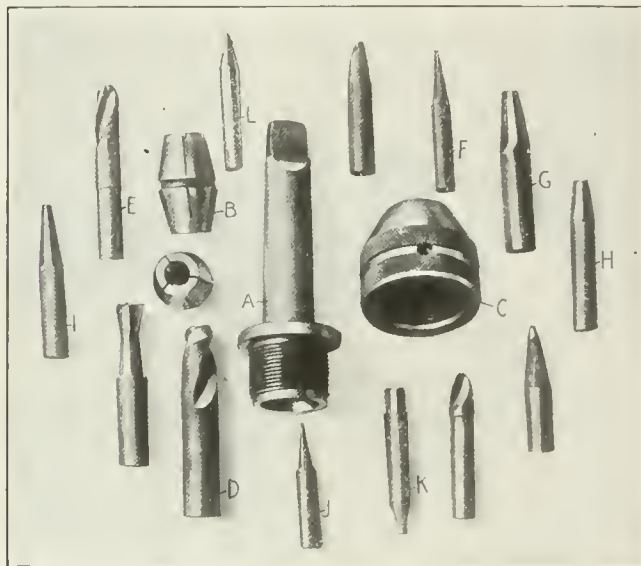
Chuck Parts and Cutters for the Die-sinking Machine
